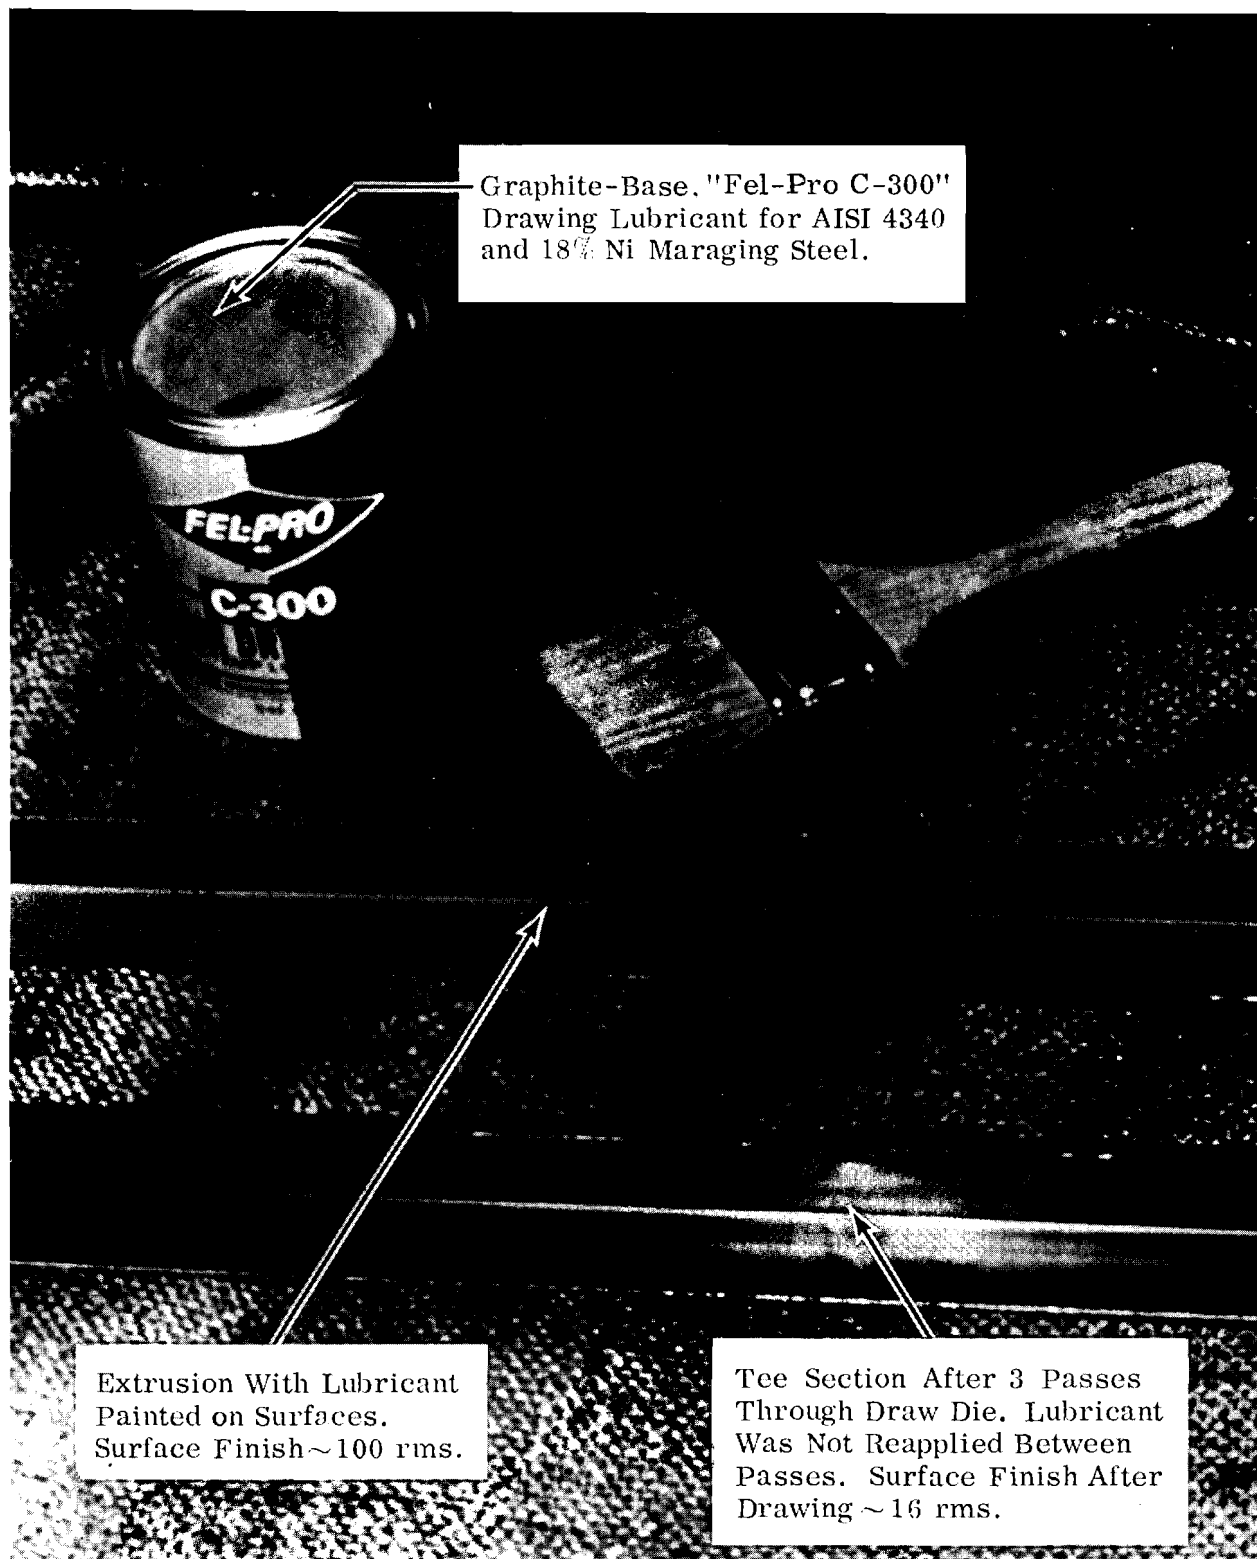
VIEW OF EXTRUSIONS BEFORE AND AFTER DRAWING
